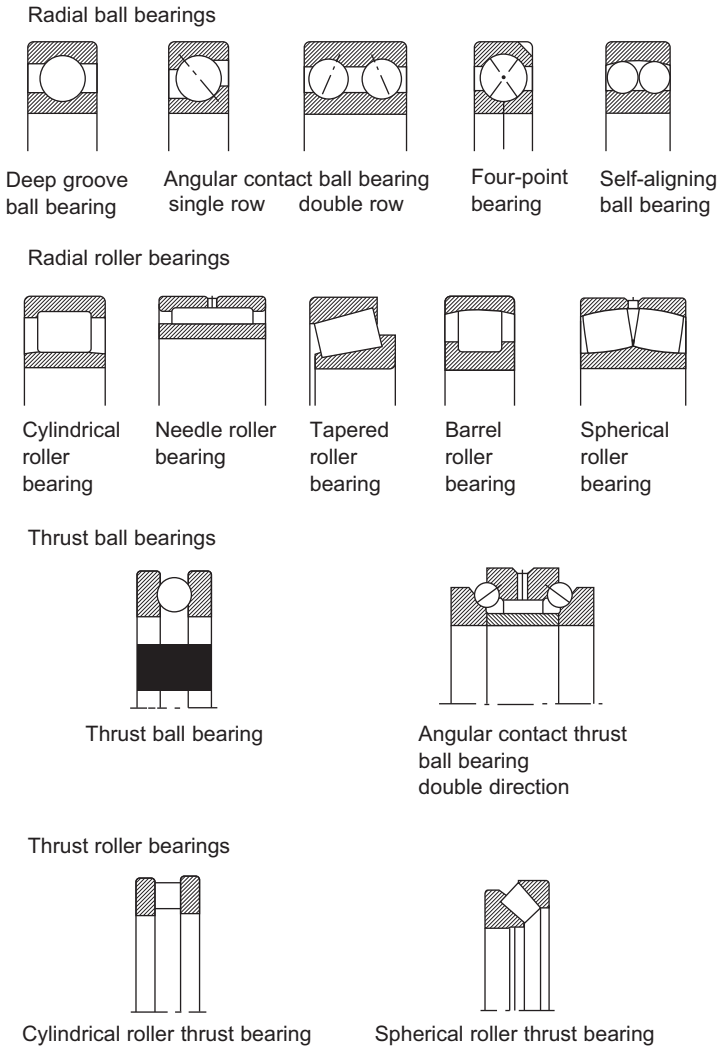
Types of rolling bearings (courtesy FAG bearings).
